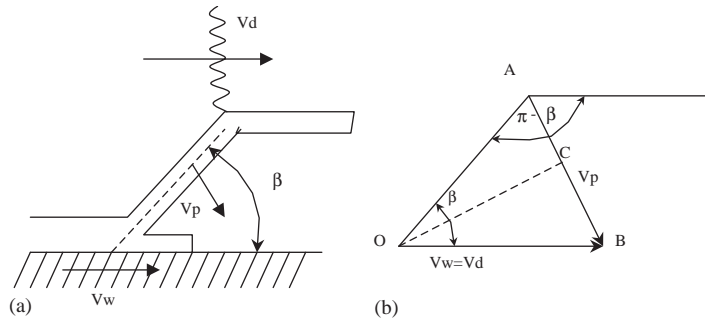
(a) Mechanism of explosive welding (parallel configuration); (b) geometrical analysis.
